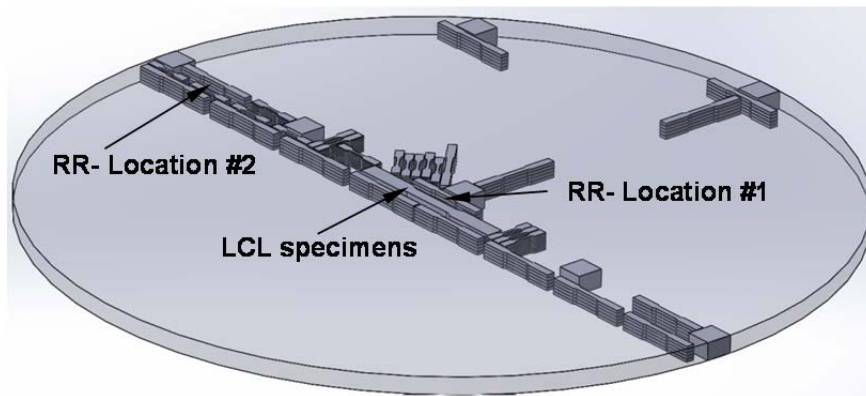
Isometric view showing how tensile bars were machined the through thickness section of a plate.
